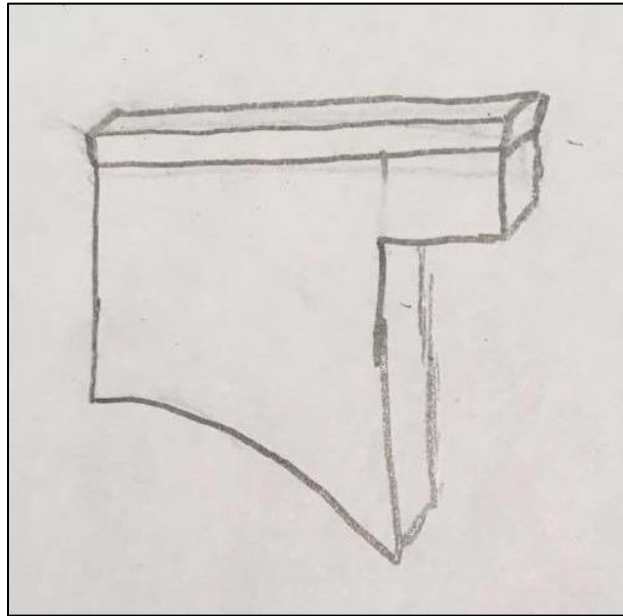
Mechanical Bottle Straightening Mechanism Sketch
